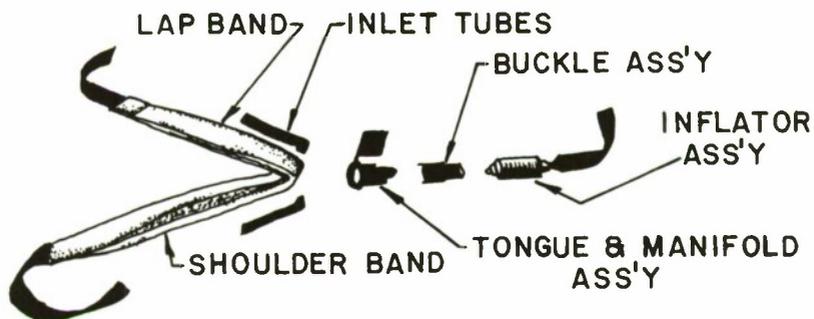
Exploded view of Inflataband™ components [Redrawn after Burkes et al., 1975 (820)].
